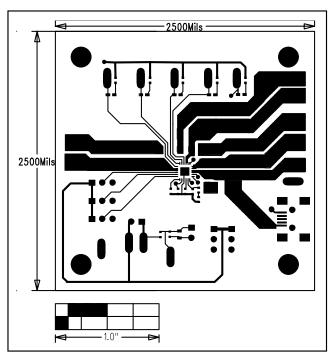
MAX8677A EV Kit PCB Layout—Component Side
